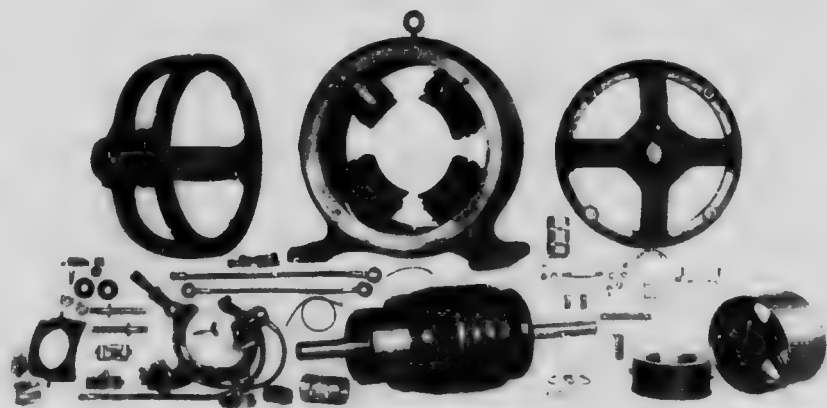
Crocker-Wheeler Standard Four-Pole Motor without Interpoles
